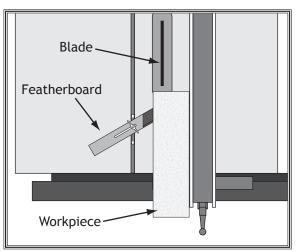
Featherboard installed in miter slot and supporting workpiece for ripping cut.
